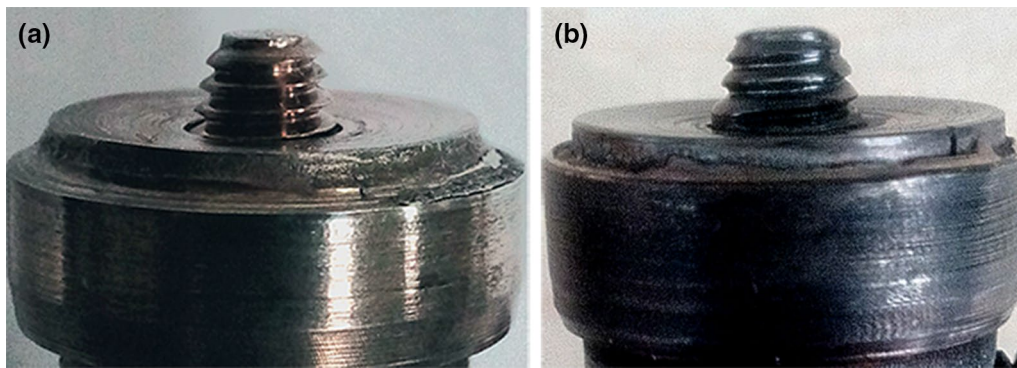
Welding tools a before, b after all welding operations
